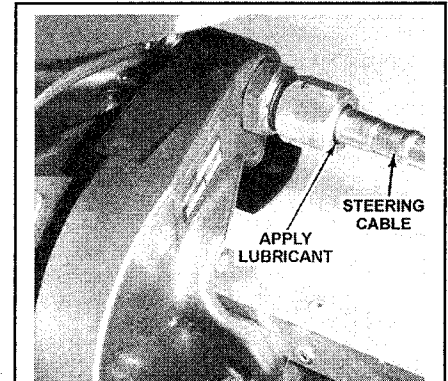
The steering cable should be lubricated with Yamaha All Purpose Grease also
